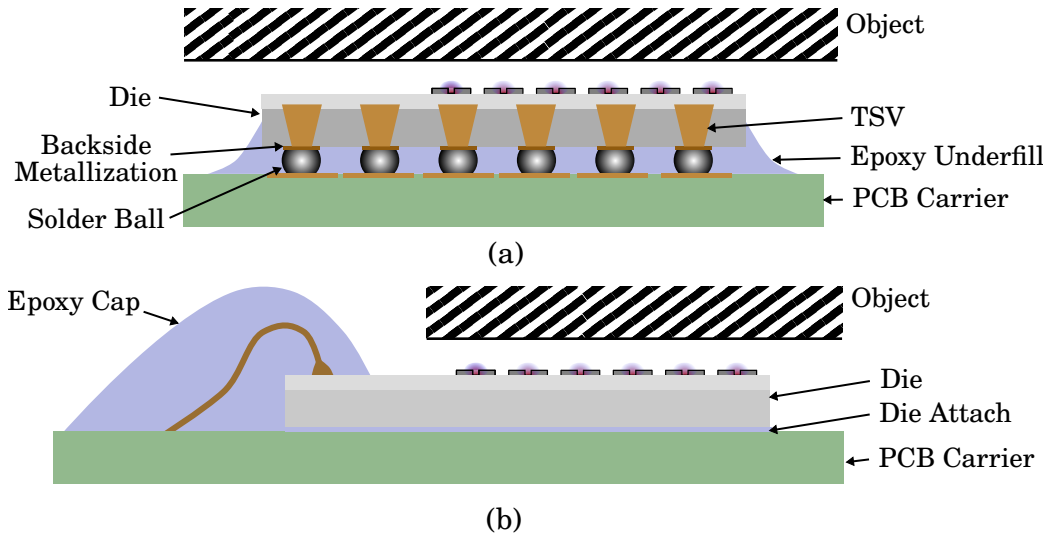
Illustration of the two packaging options. SoC assembly with the die connected to a PCB carrier through the chip backside using TSVs (a) and standard wire-bonding and bondwire encapsulation (b).
